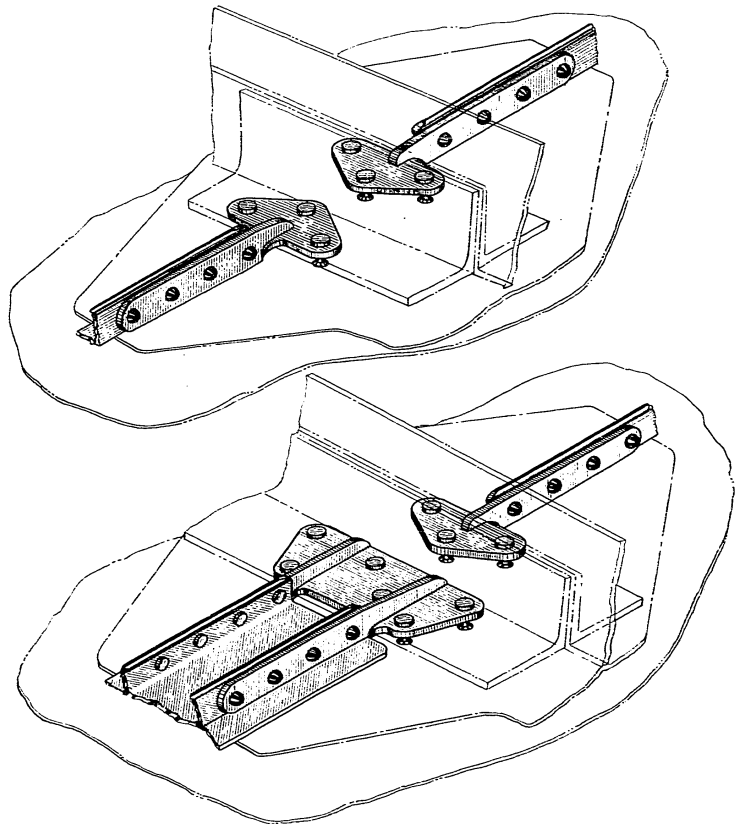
STANDARD STRINGER-TO-STRESSED FRAMES ATTACHMENT FITTINGS.
